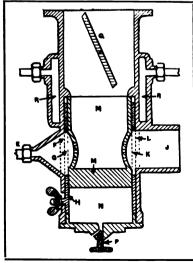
Mixing Chamber of Noble Bi-Fuel Carburetor.
